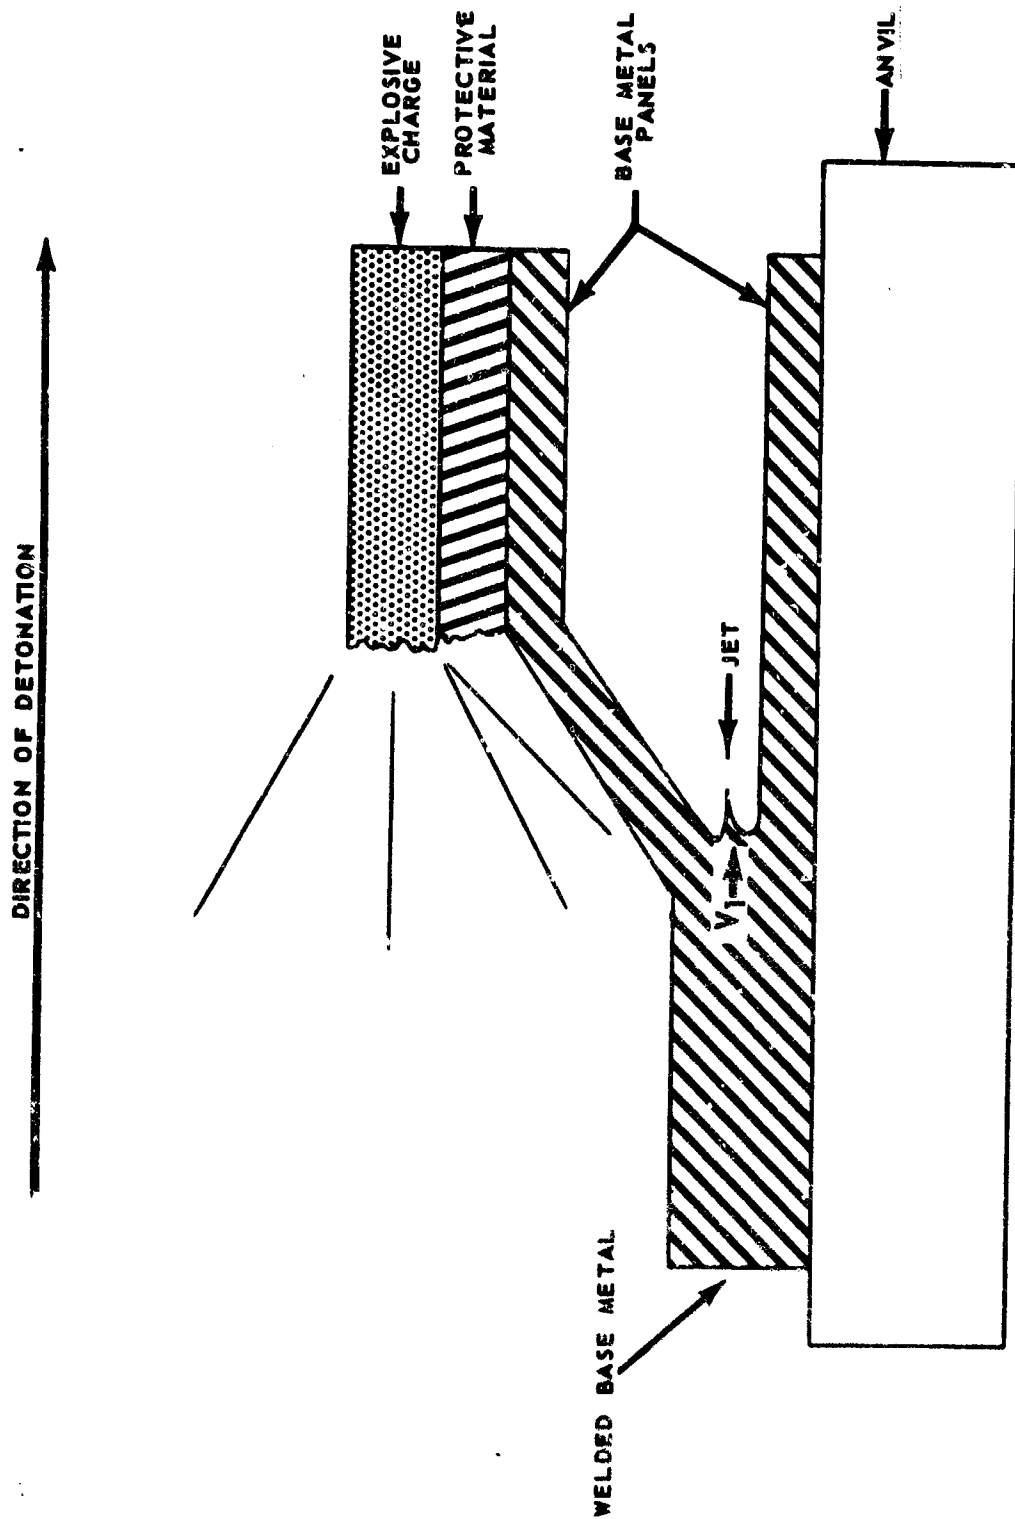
ILLUSTRATION OF JETTING IN EXPLOSIVE BONDING
